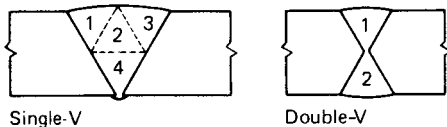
Comparison of weld metal required for single- and double-V-groove weld joints
